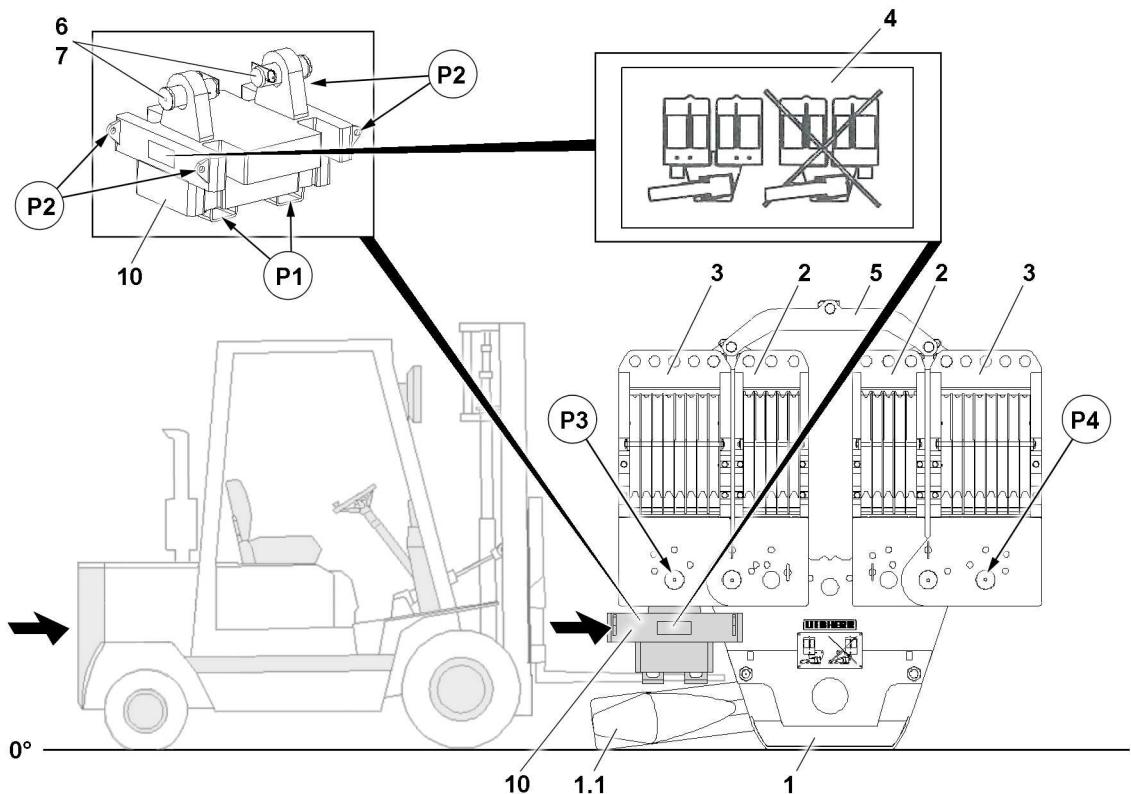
Assembling the auxiliary weight 4 t 10 on the double hook block 1350 DMZ
